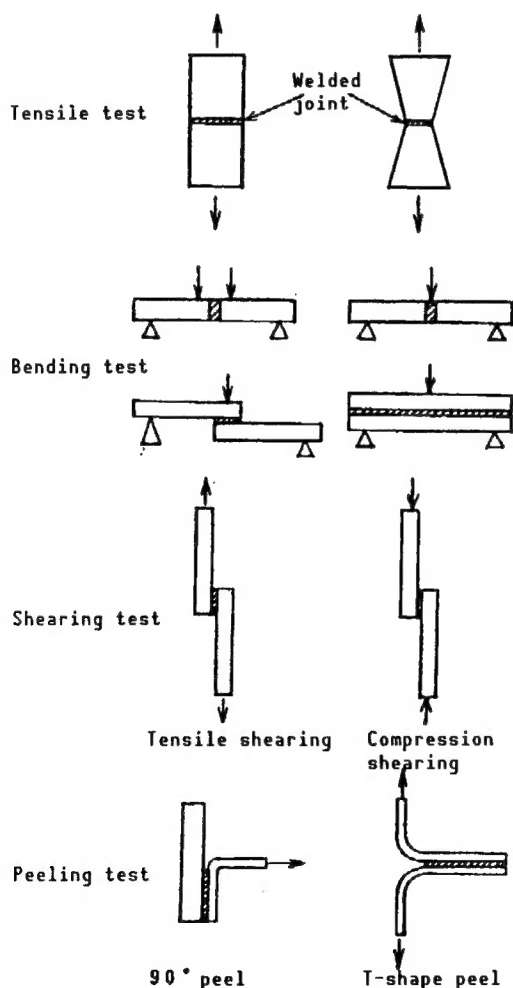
outlines the major methods for testing welding strength. The welding strength is greatly affected by such factors as the dimensions and profile of the testpiece, the combination of materials, the thickness of the welded layer, and the ambient temperature. Therefore, ordinarily, many samples with the same conditions are tested, and their average value is obtained for the welding strength evaluation. In addition, clearly recognizing the purpose of the welding strength test is important.
